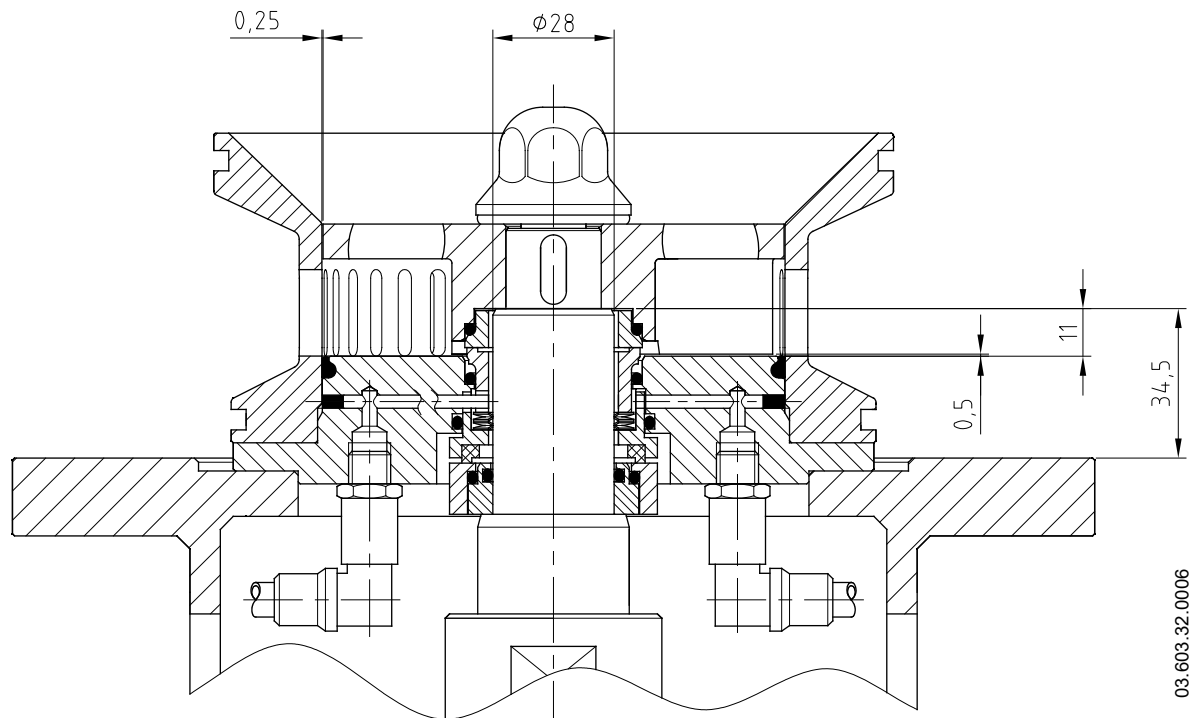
Assembly dimensions for double mechanical seal the size ME-6103/6105/6110 RE.
